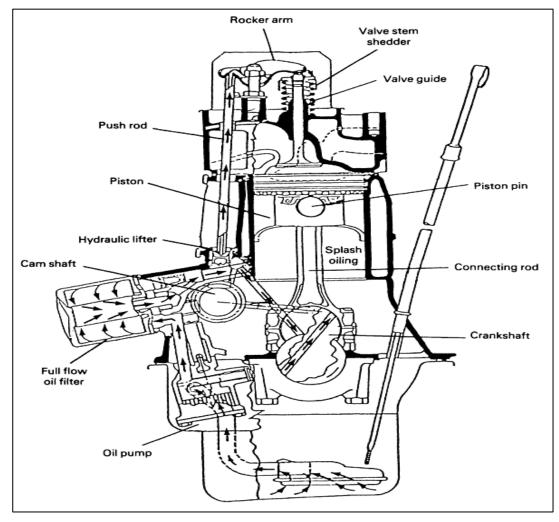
Lubrication mechanisms in cam-in-block overhead block valve engine.
